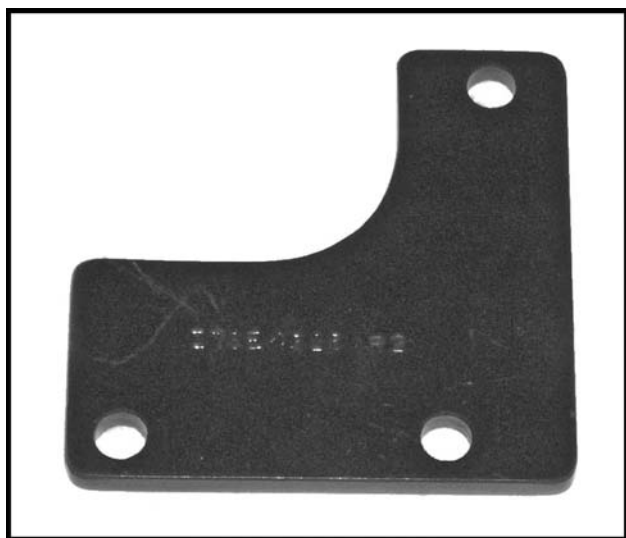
Oil Cooler Test Plate / Pressure Adapter, ZTSE4525
